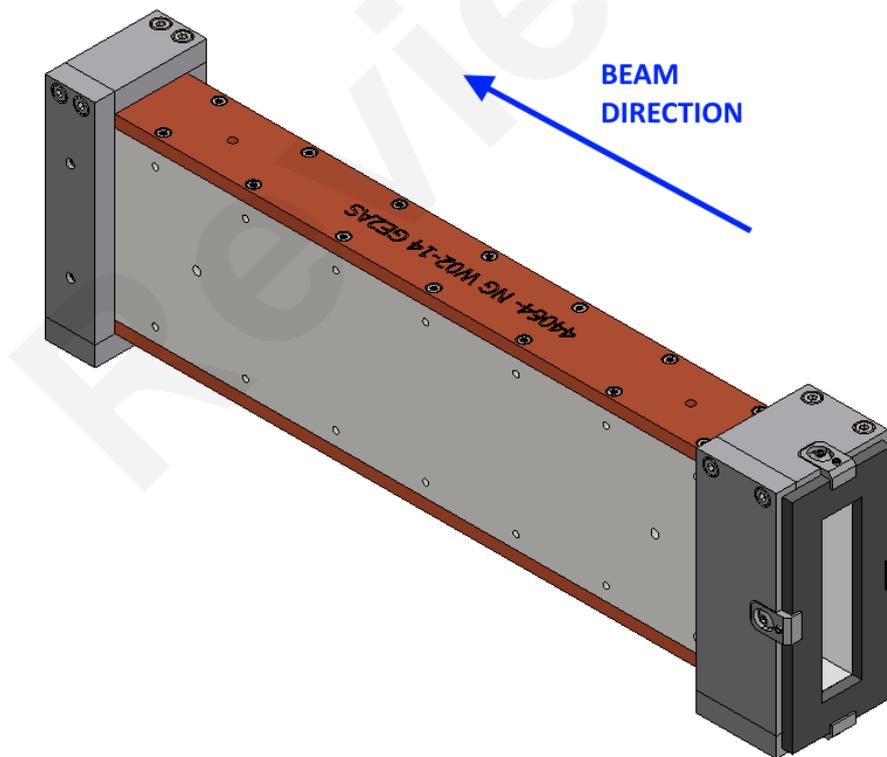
GE2AS sub-section assembly of the neutron guide W02-14 with the from end 5 mm thick Mirrobor™ mask.
